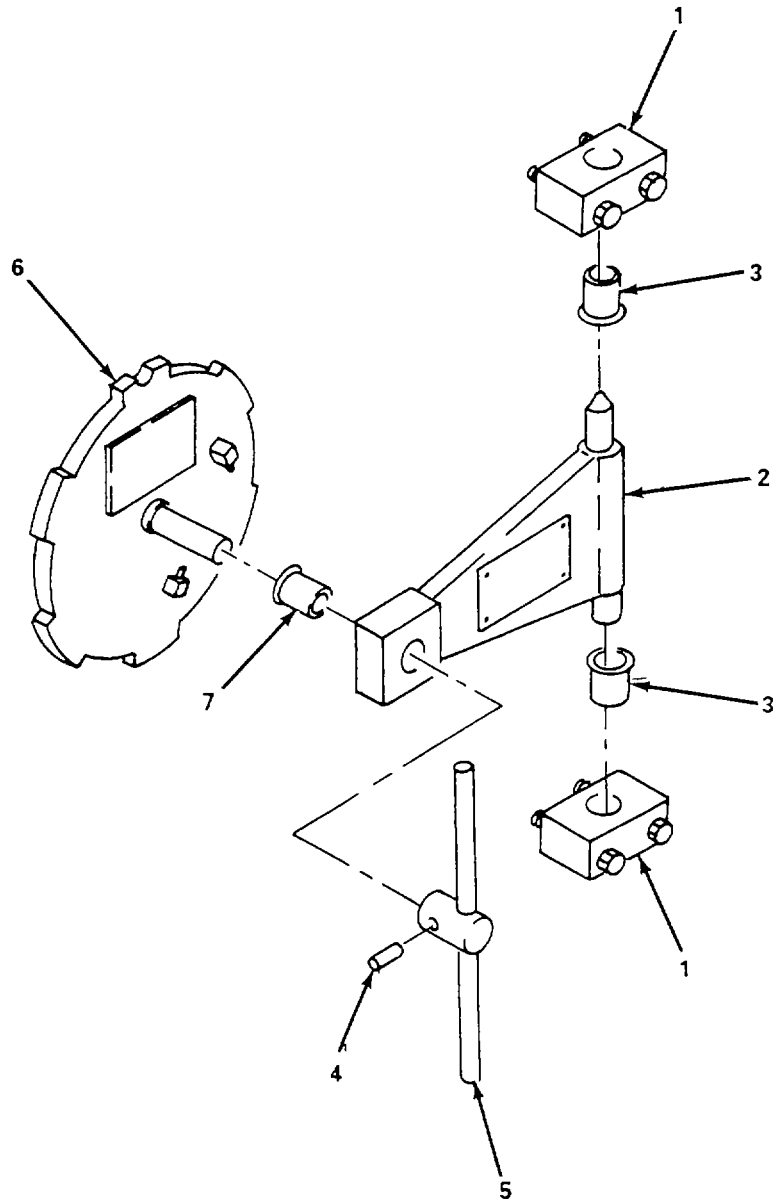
Medical Lock (M/L) Outer Door Assembly, Repair.
